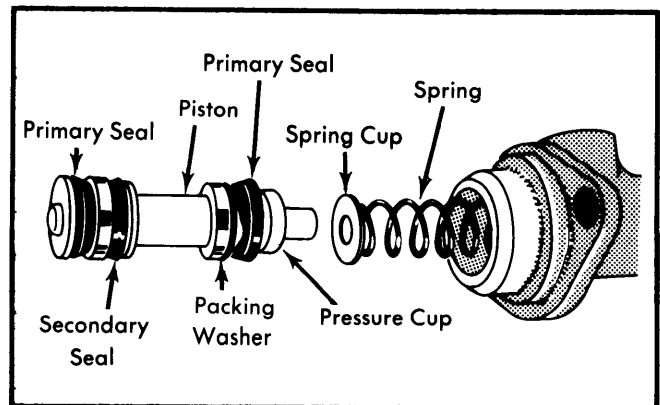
Master Cylinder Secondary (Front) Piston Assy.
